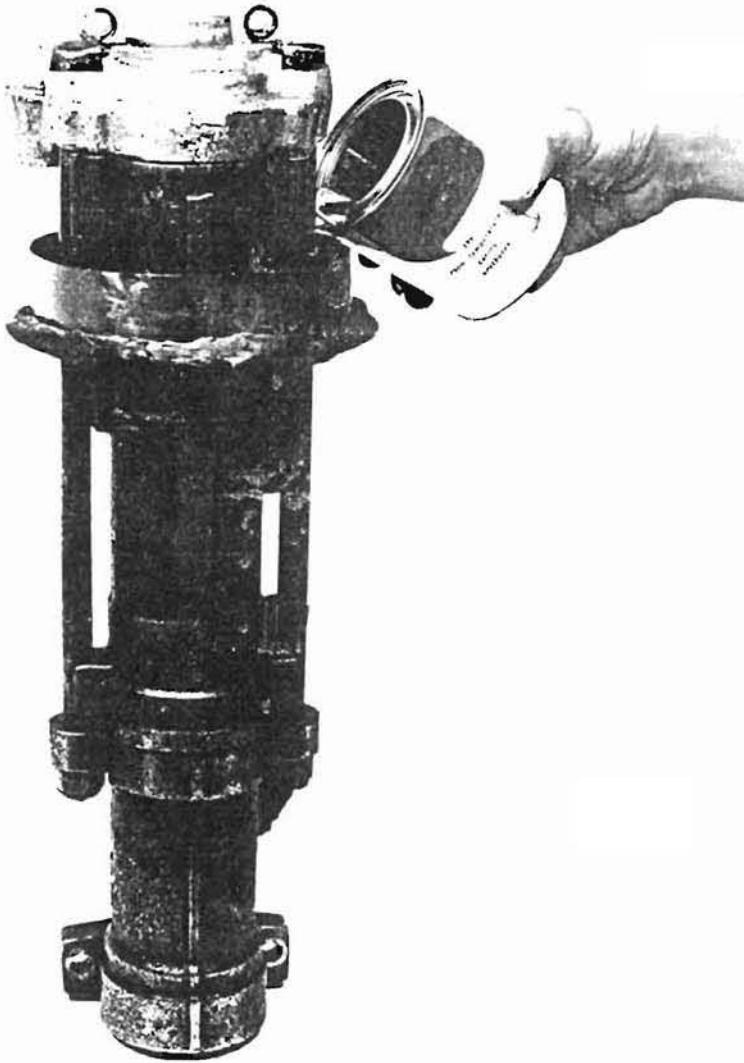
Method of forming caps to conform to the configuration of the drill body.
